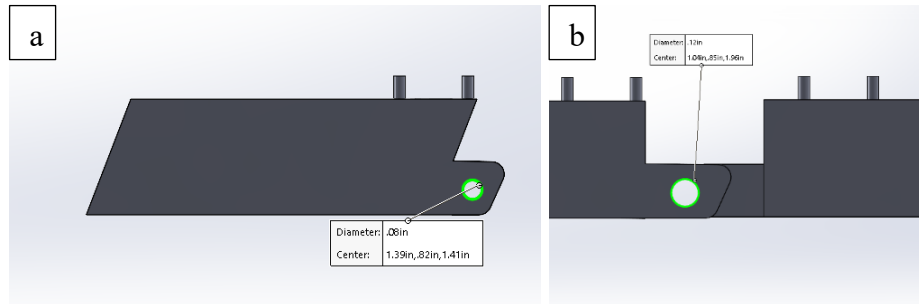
Actuator design concept 1, 1-2 (a) 0.08-inch pin joint hole (b) 0.12-inch pin joint hole
